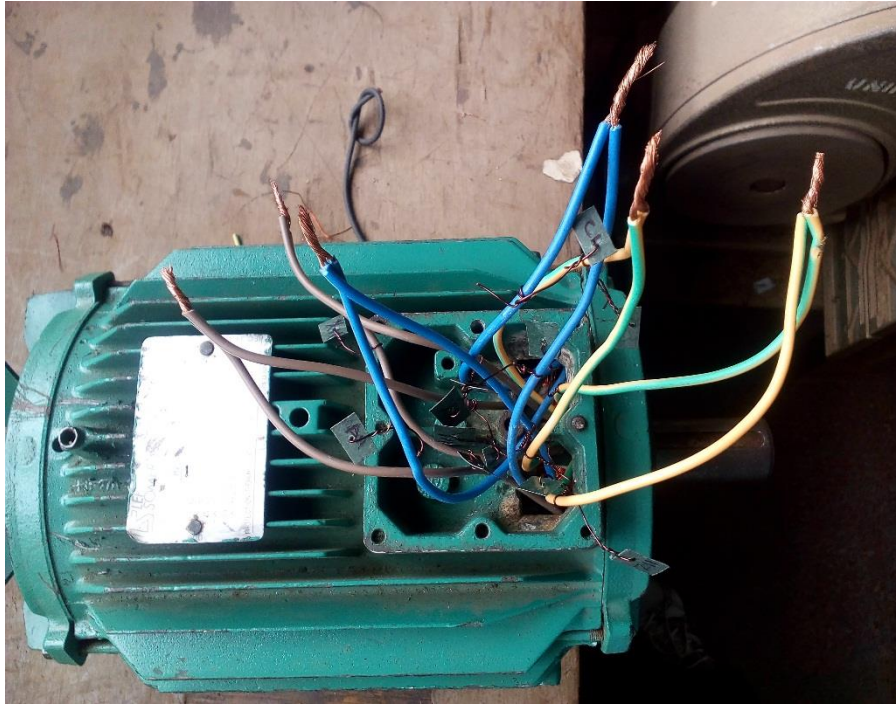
Pictorial view of the completed re-developed induction motor
